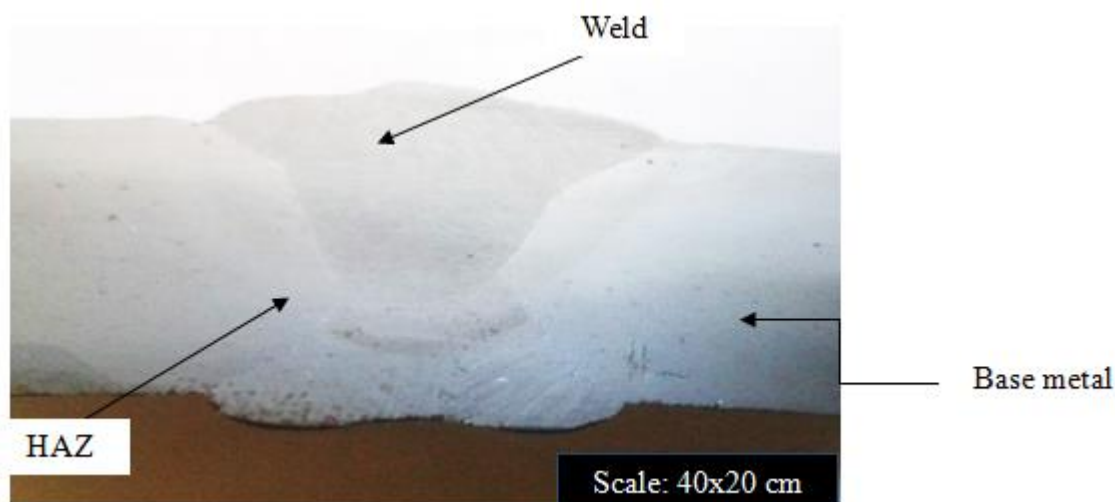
Double U-weld on X65 carbon steel
